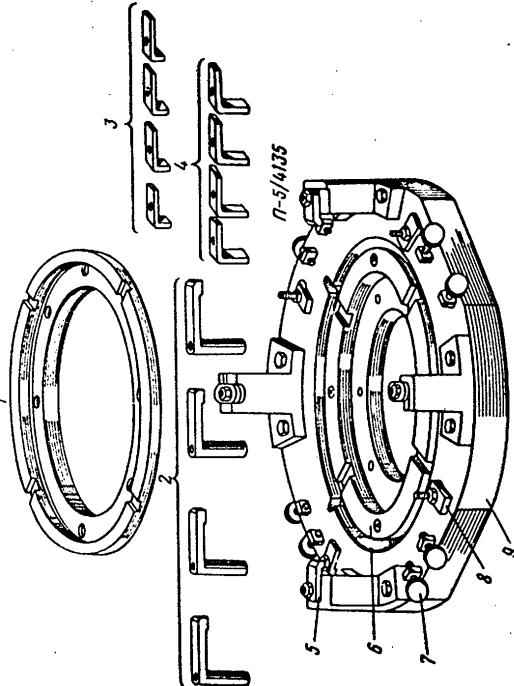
TOOLS AND FIXTURES FOR REPAIR OF CAMSHAFT AND TIMING-KIM TIMING GEAR
